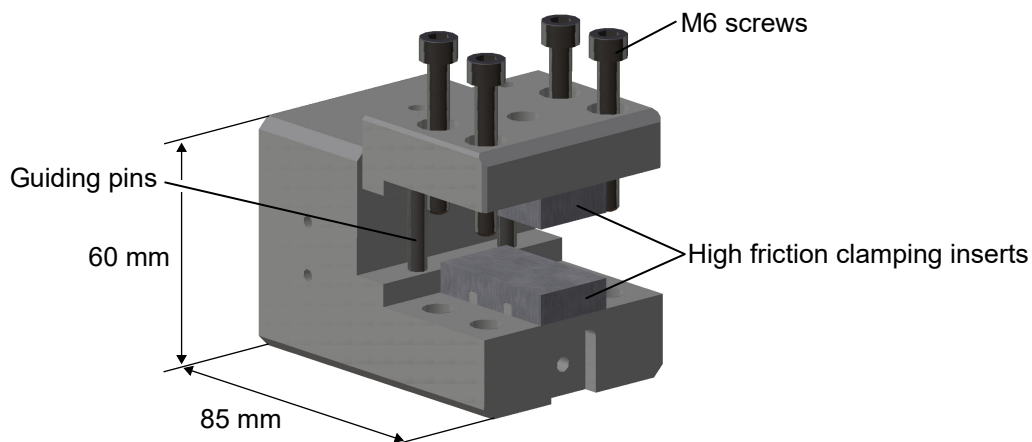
Horizontal clamping specimen grips, specially designed for cyclic tensile tests.
